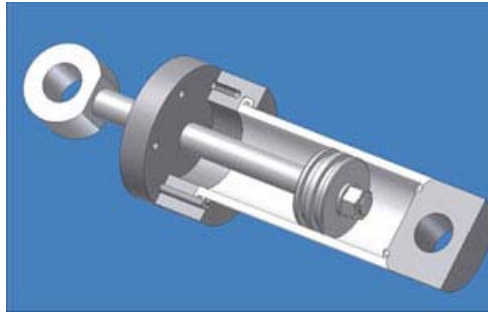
Friction welding example: hydraulic cylinder [27]
